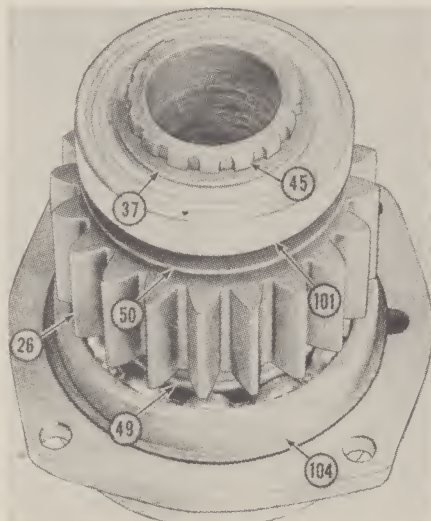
Subassembly containing pto clutch mounting sleeve (45), drive gear (26) spacers (49) and (50).
